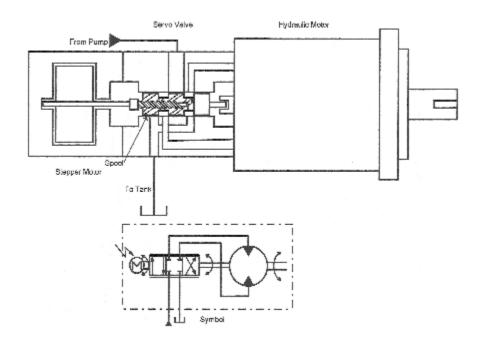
Stepper-motor driven servovalve controlling a hydraulic motor.
